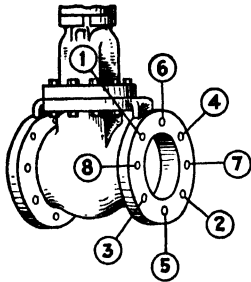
Tighten flange and bonnet bolts in diametrically opposite pairs. (Courtesy of Crane Co.)
